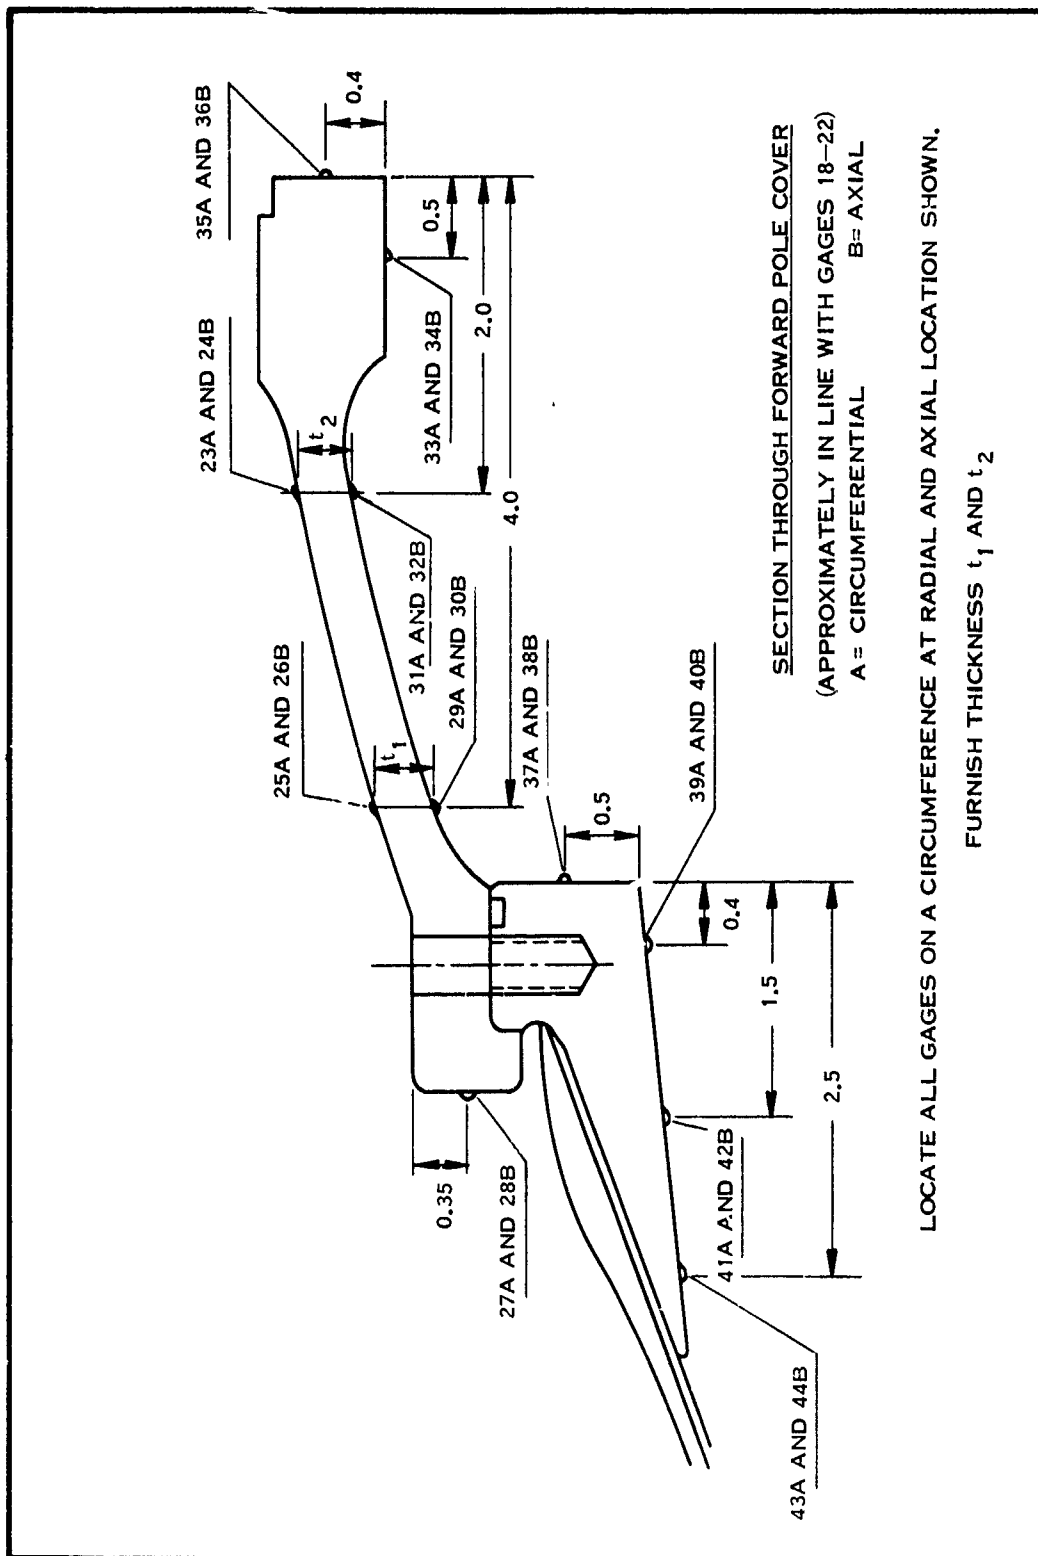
TU-290 Case No. 3 Hydroburst Test Strain Gage Arrangement - Forward Polar Fitting
